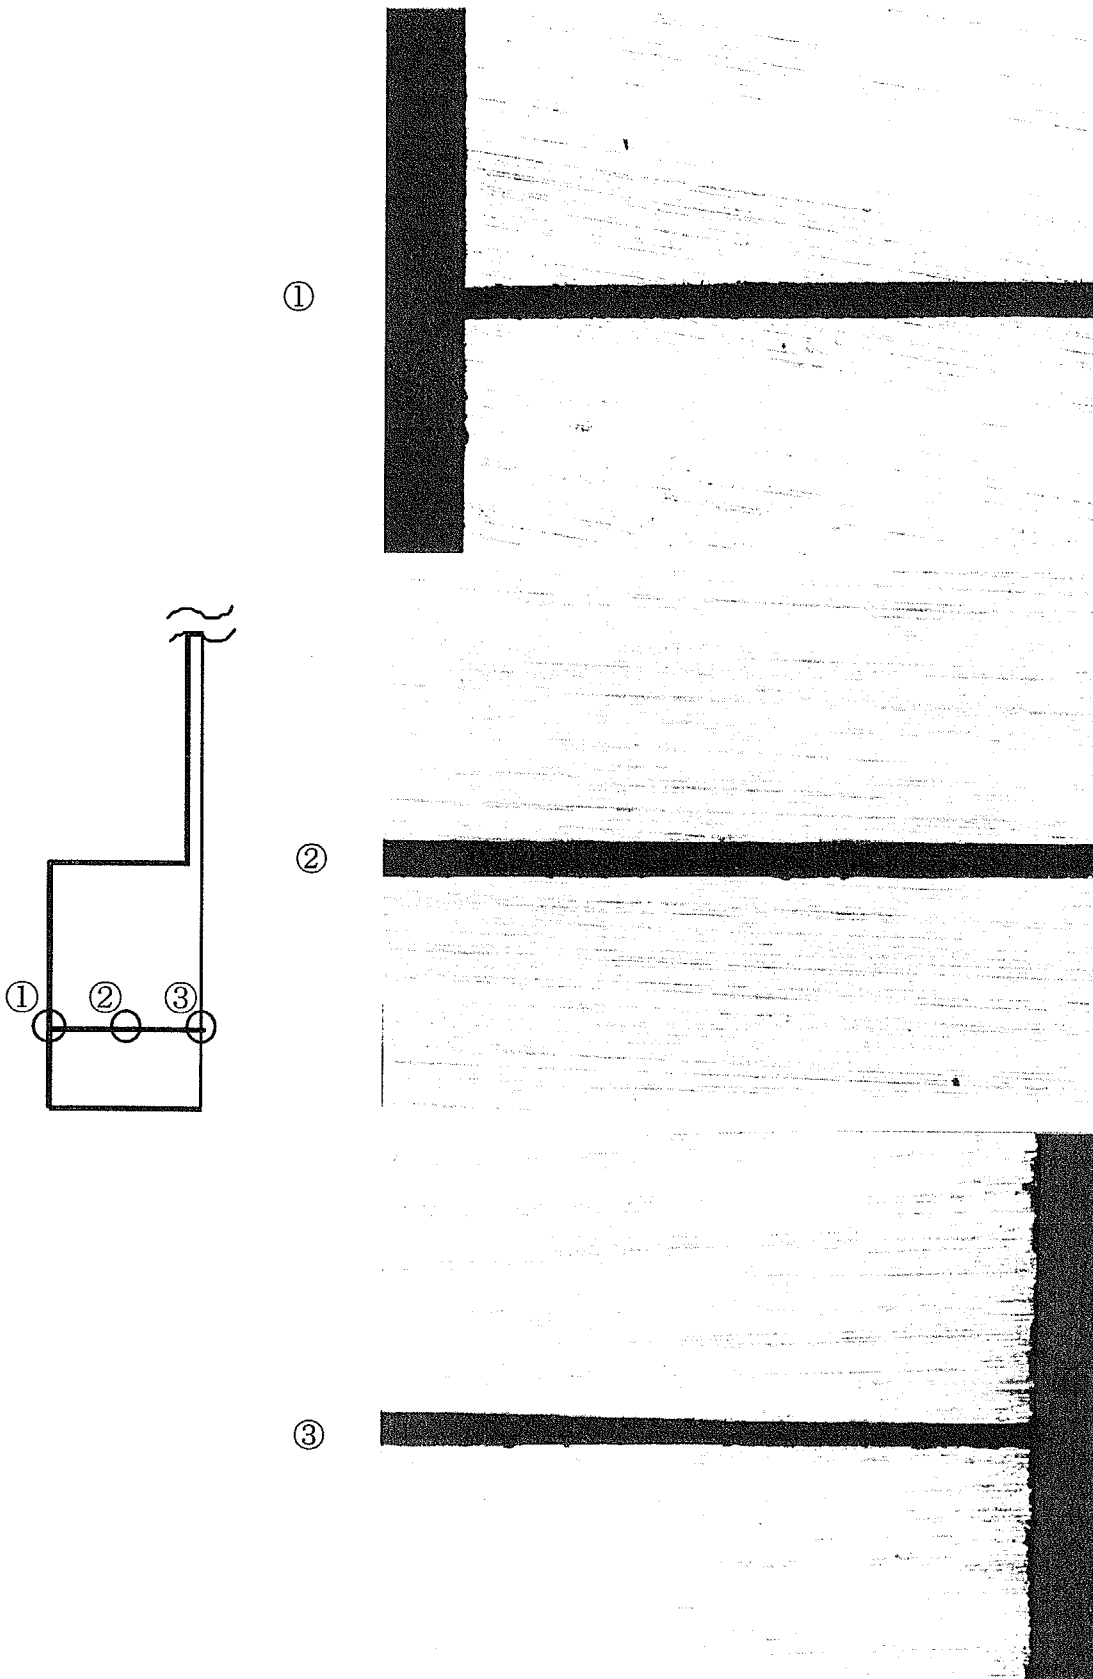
Photo of magnified view of crevice opening on opening surface (A-8, x50)
